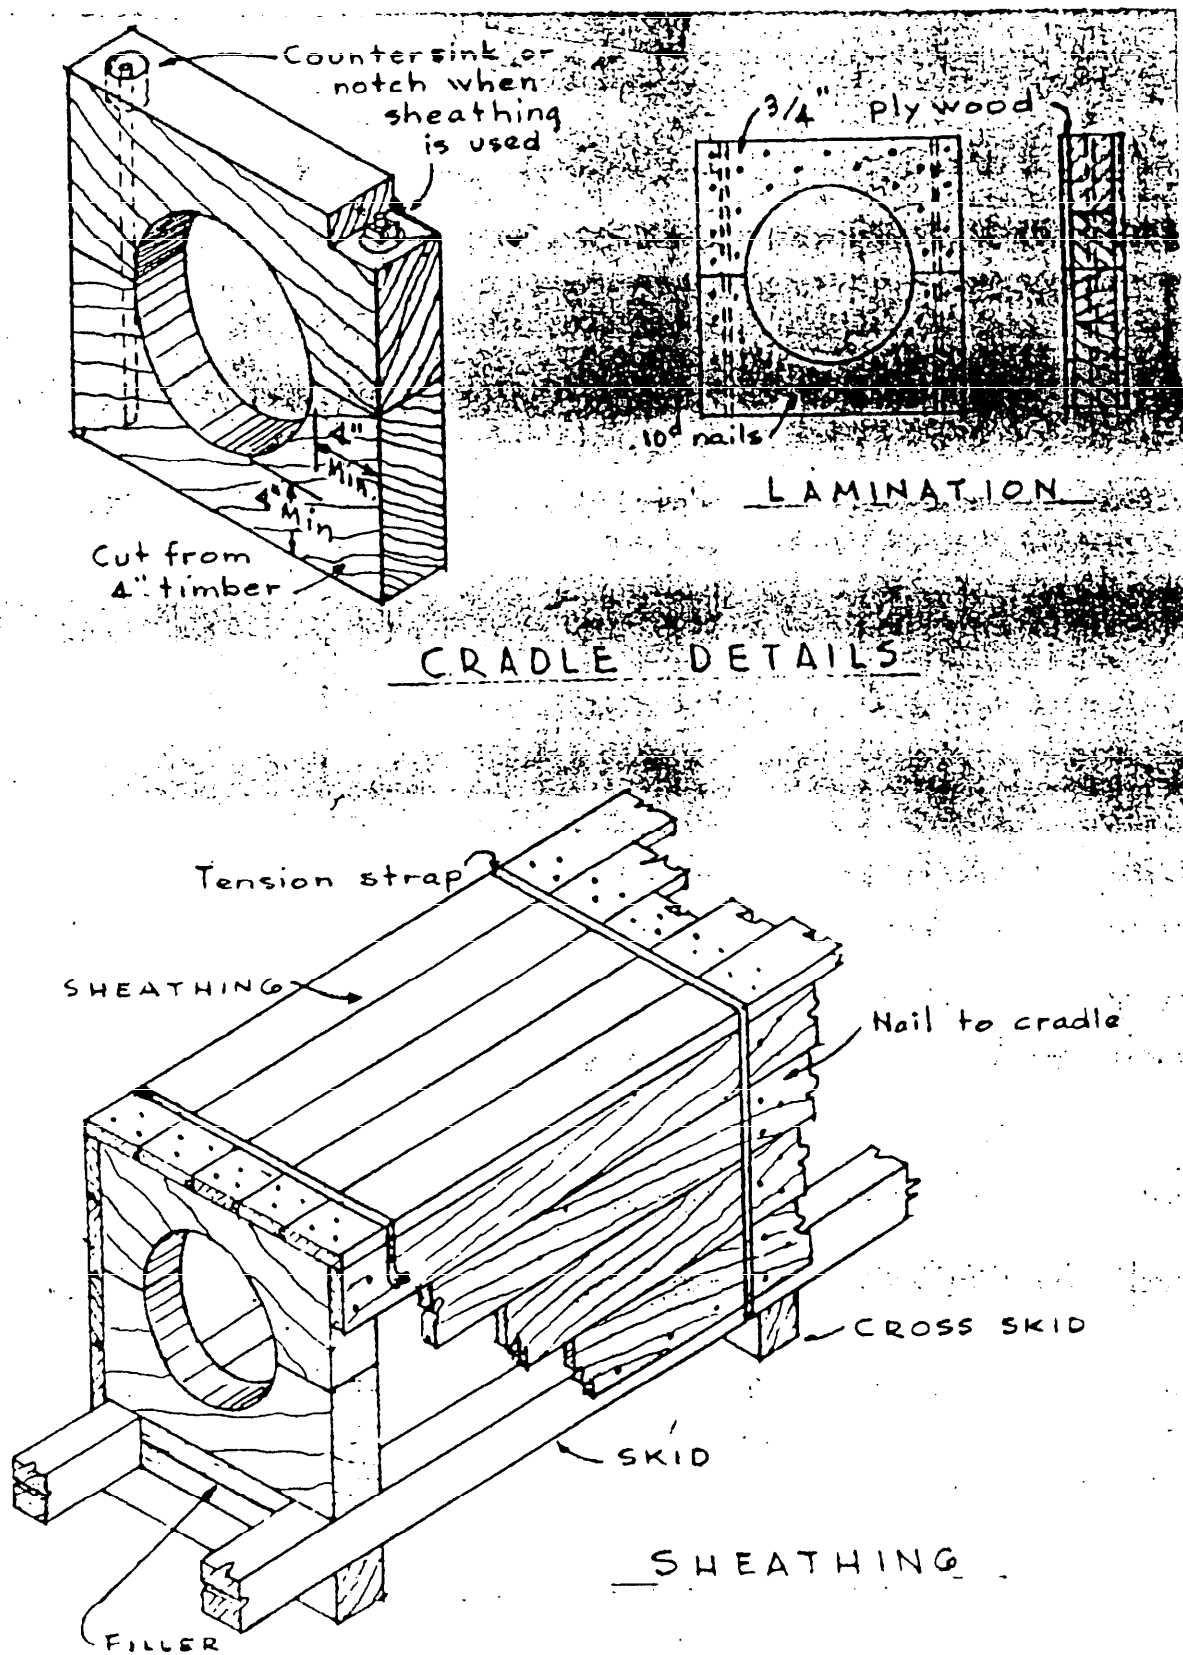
Skid assembly details (see 3.9.1.2.2.2).
